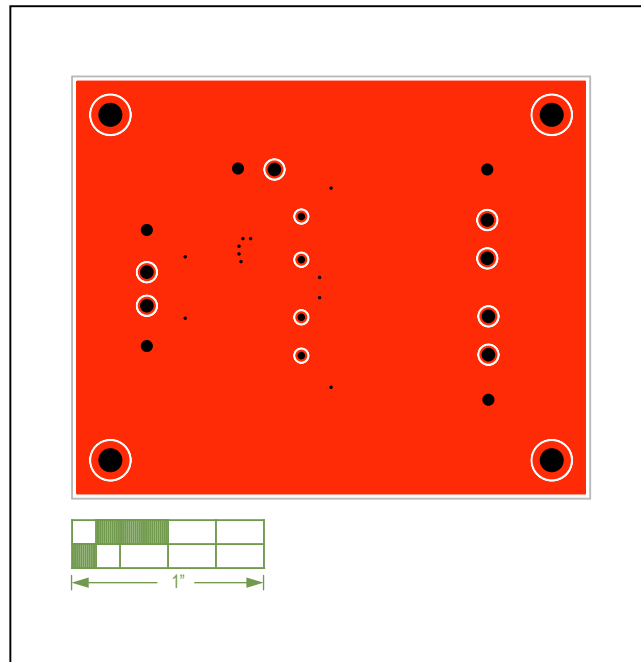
MAX44285 EV Kit PCB Layout—Solder Side
